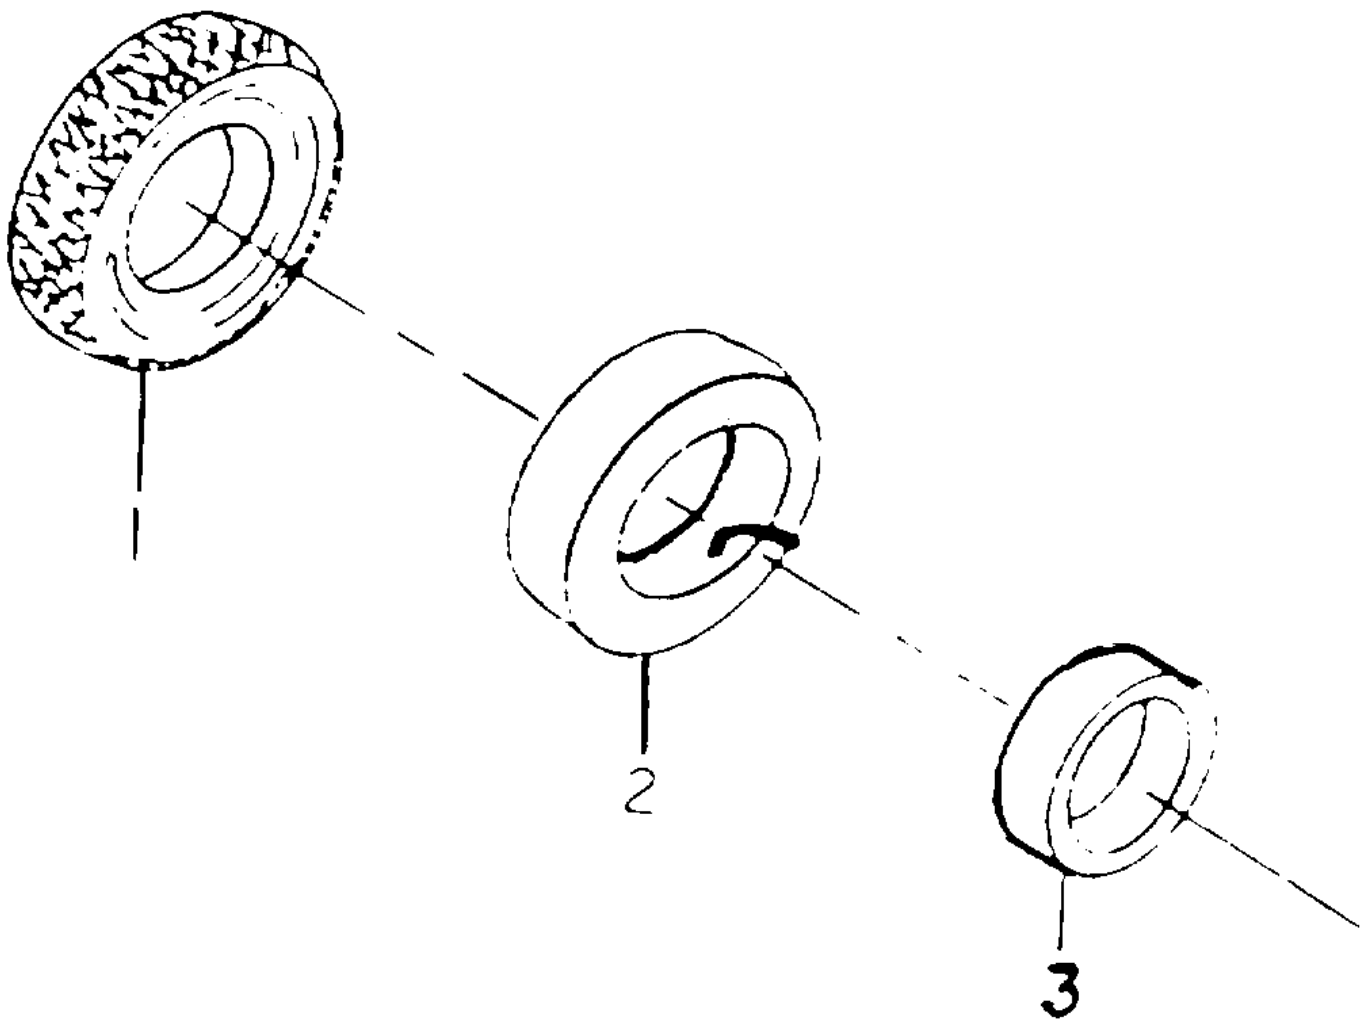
TIRE, TUBE, FLAP, STEER WHEELS
